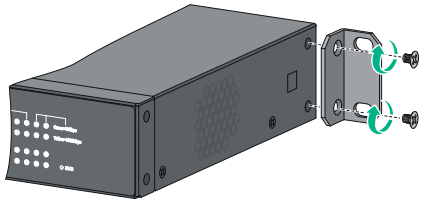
Attaching a four-hole mounting bracket to the front mounting position on an HPE 5130 24G SFP 4SFP+ EI switch
